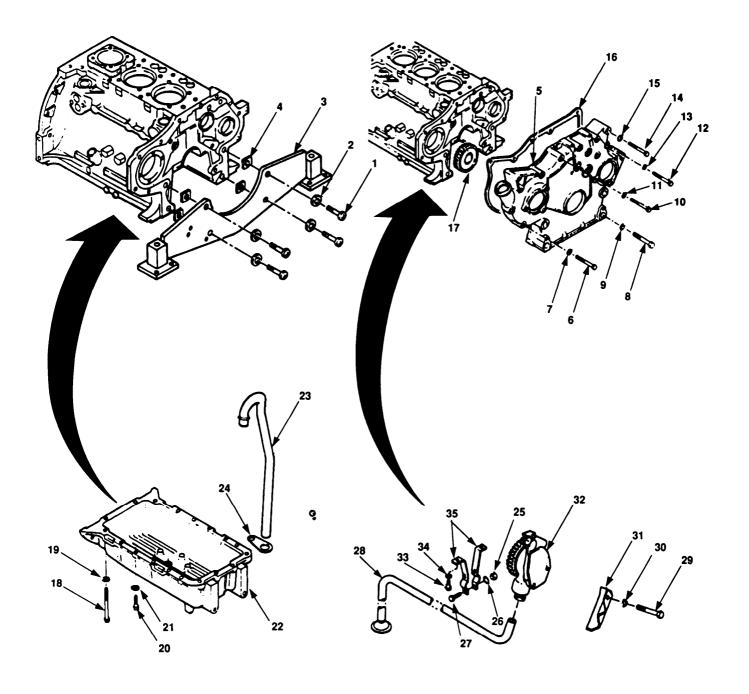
Engine Mount, Front Cover, and Oil Pump Removal.
